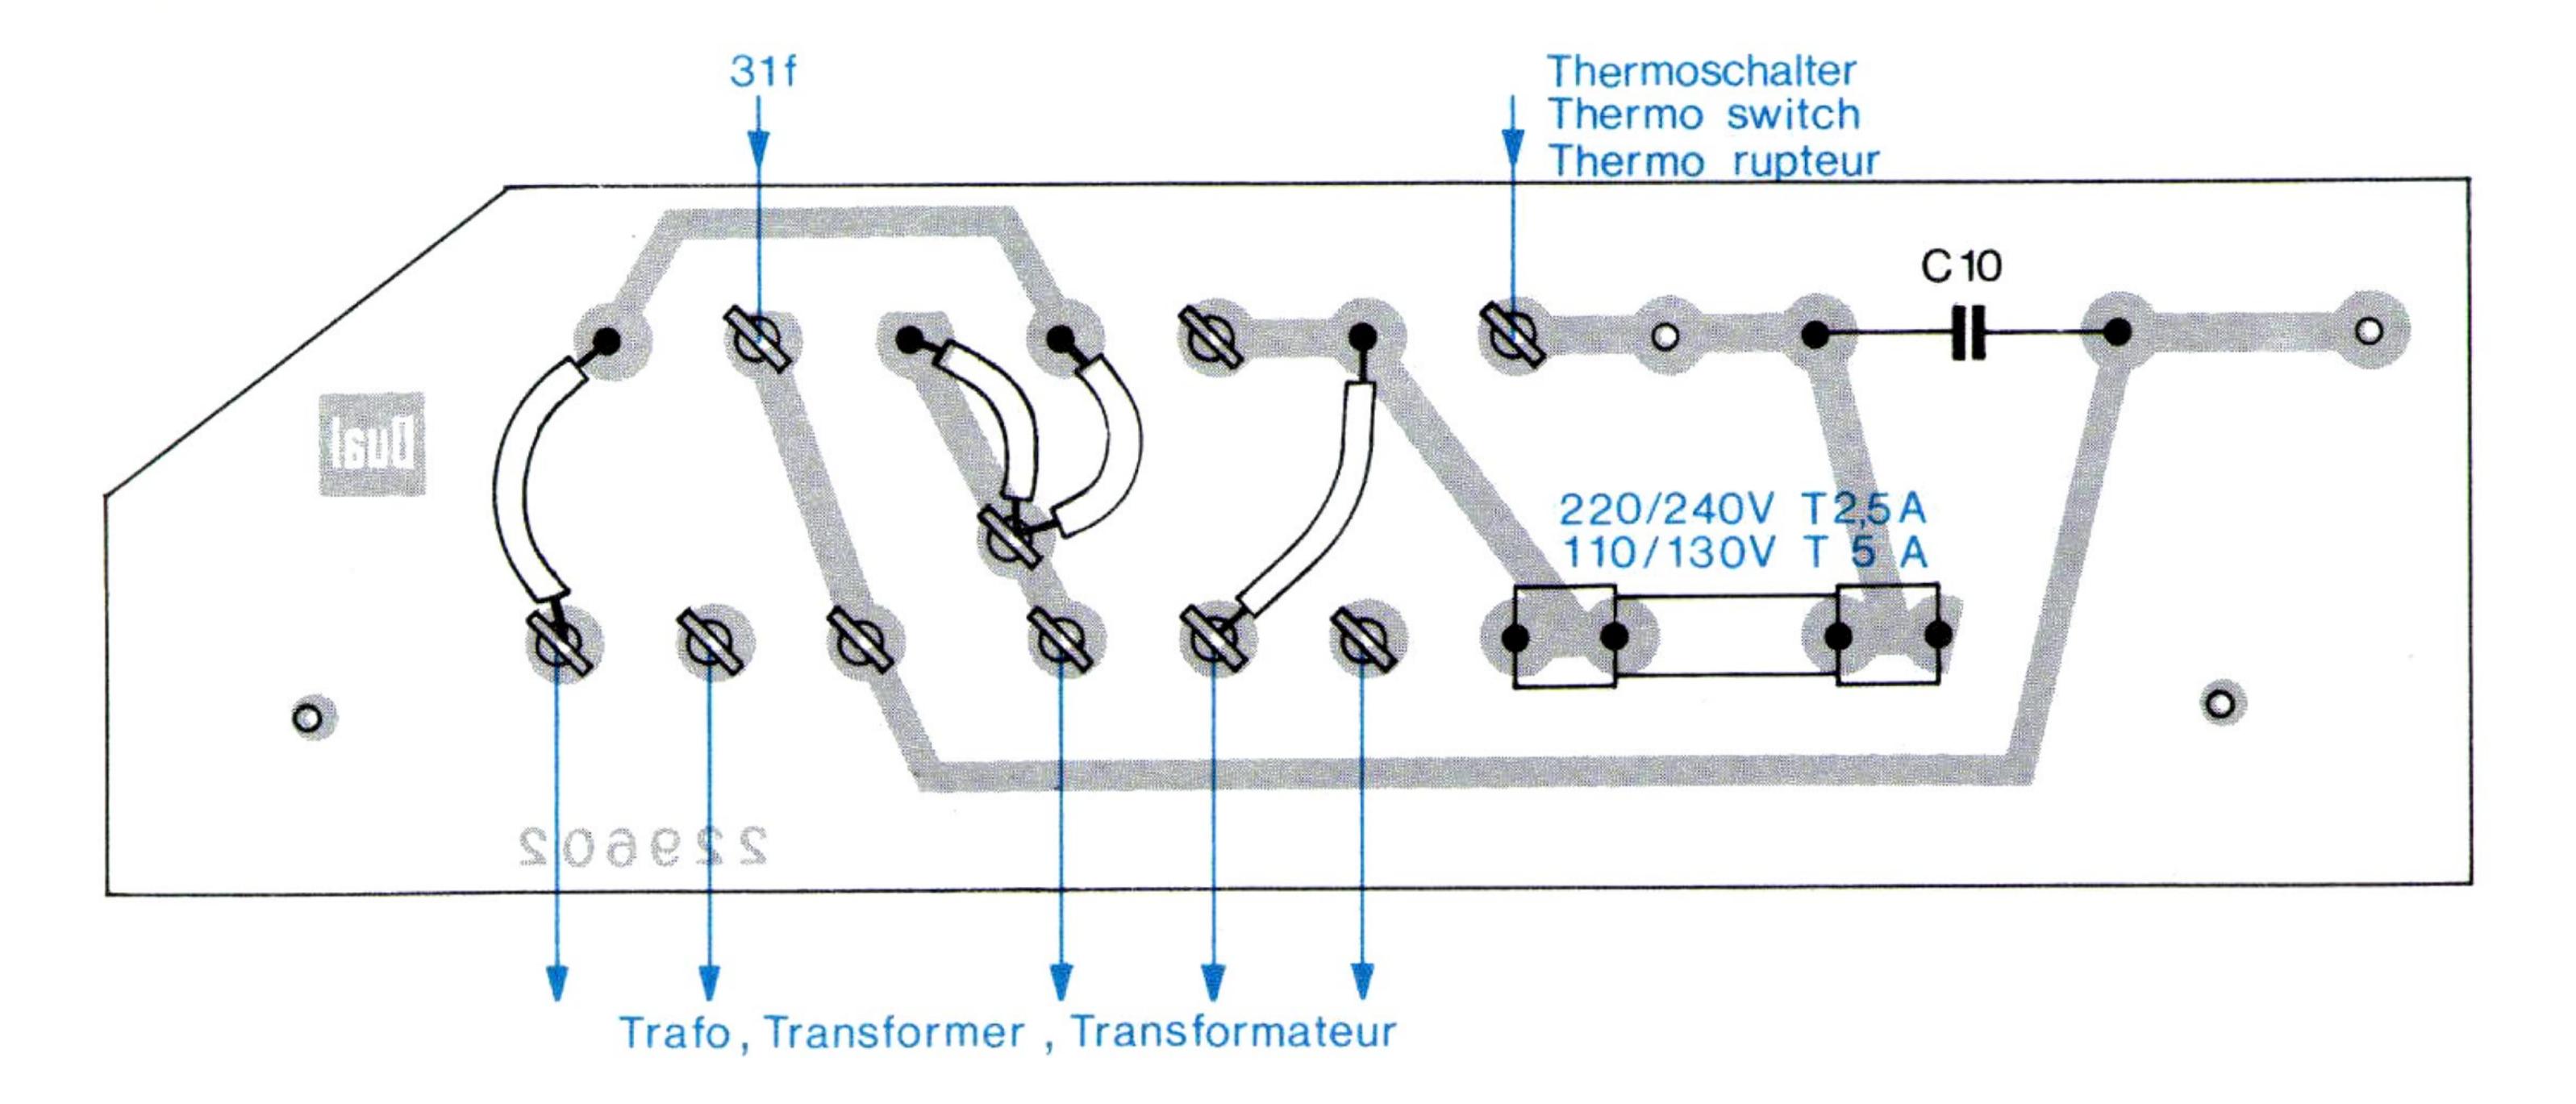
Tapping scheme, 110, 117, 220, 240 V
